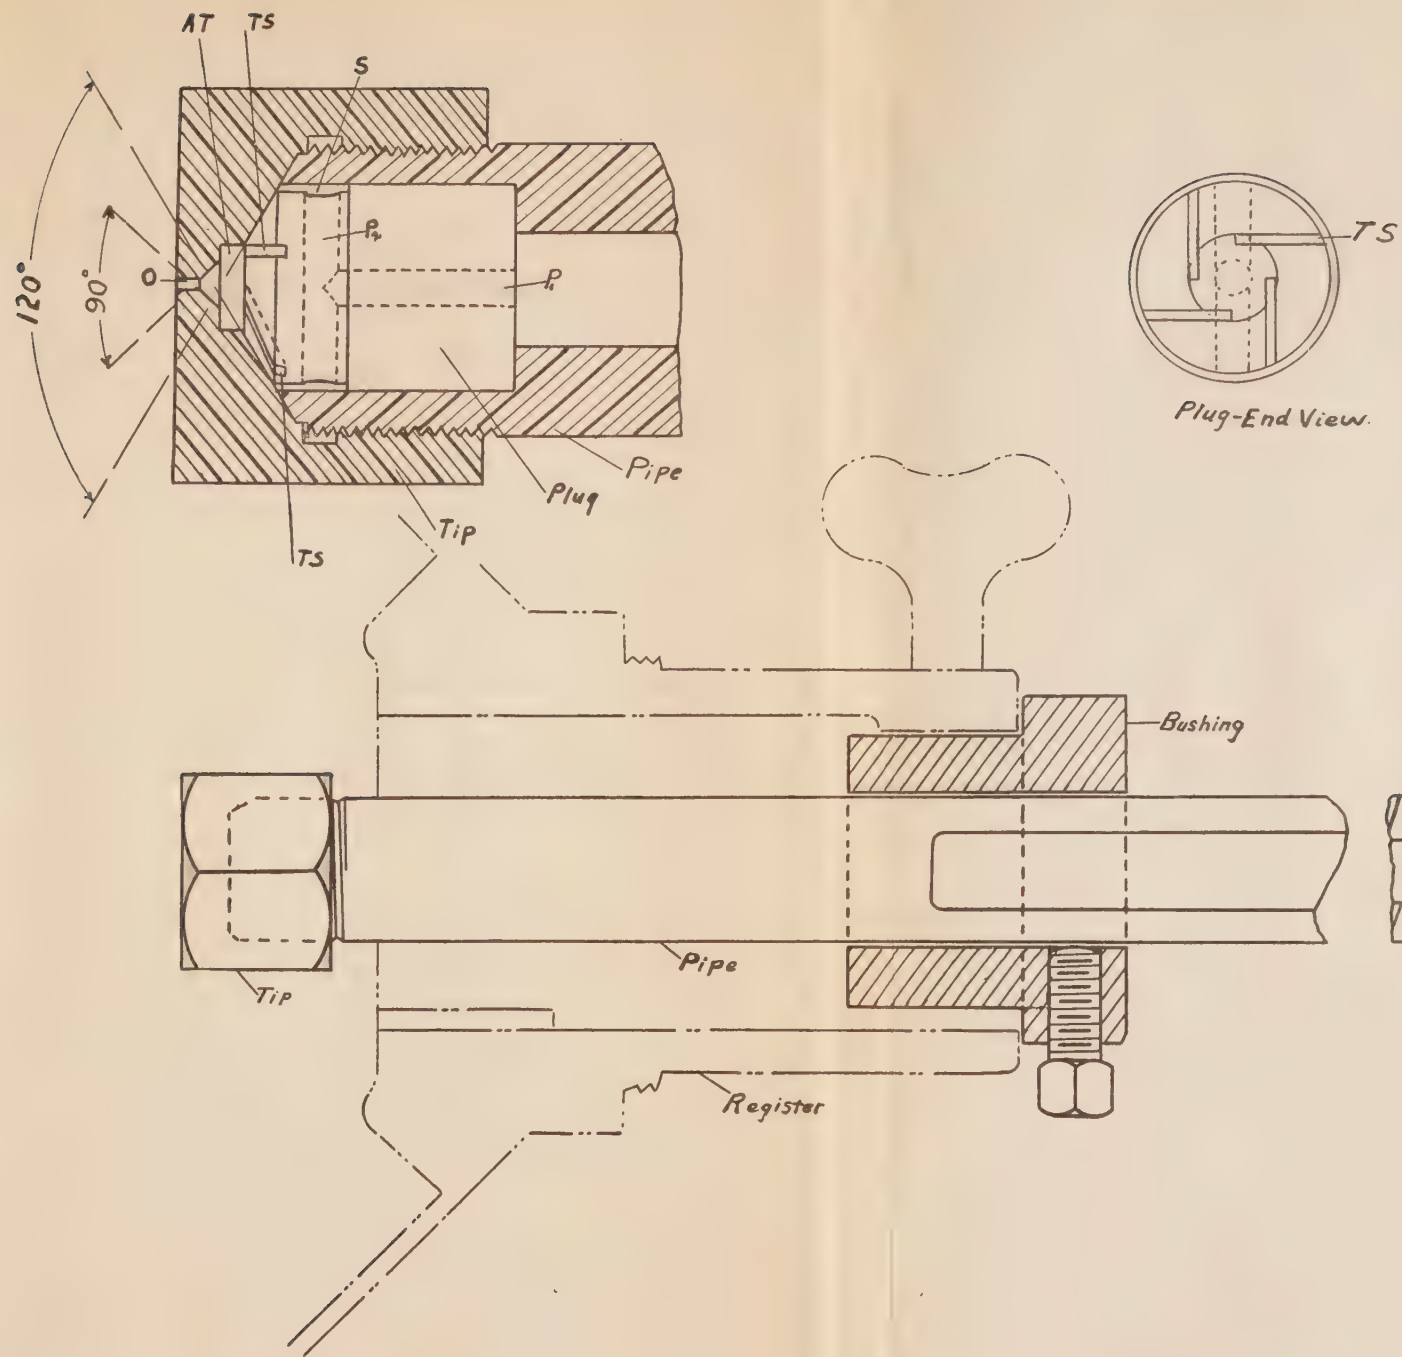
Bureau of Engineering Standard Fuel Oil Atomizer.
